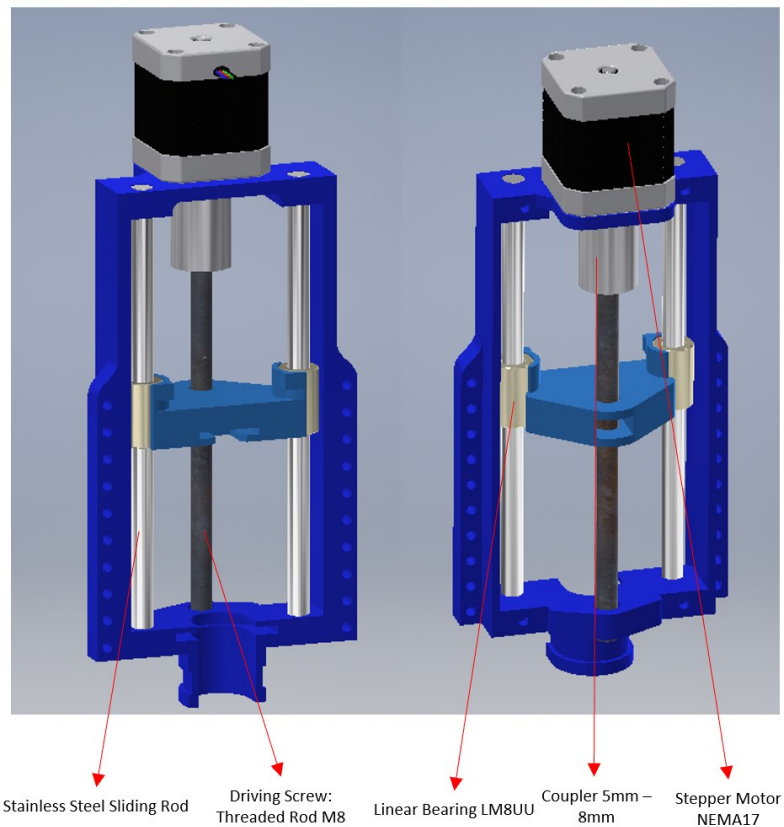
Levinger's Universal Paste Extruder Full Assembly []
